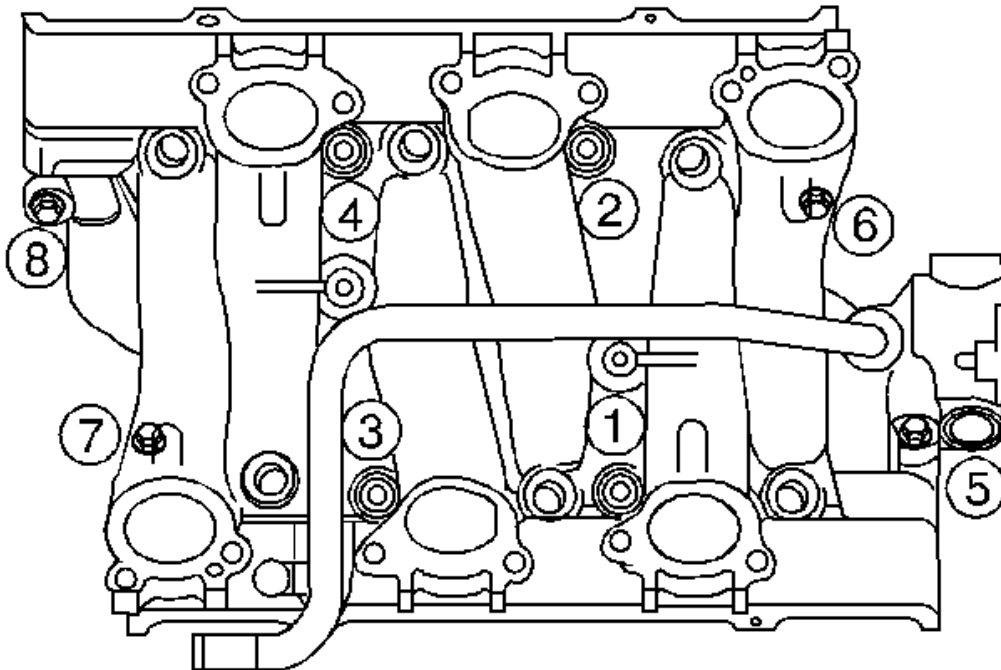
View Of Lower Intake Manifold Bolt Tightening Sequence
